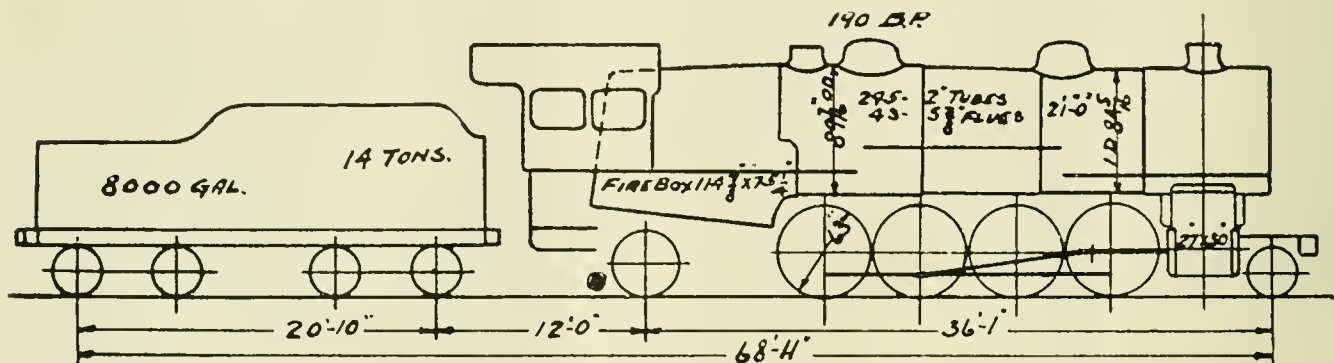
Locomotive B, Showing General Dimensions of a Fairly Modern Locomotive Not Equipped With a Booster
